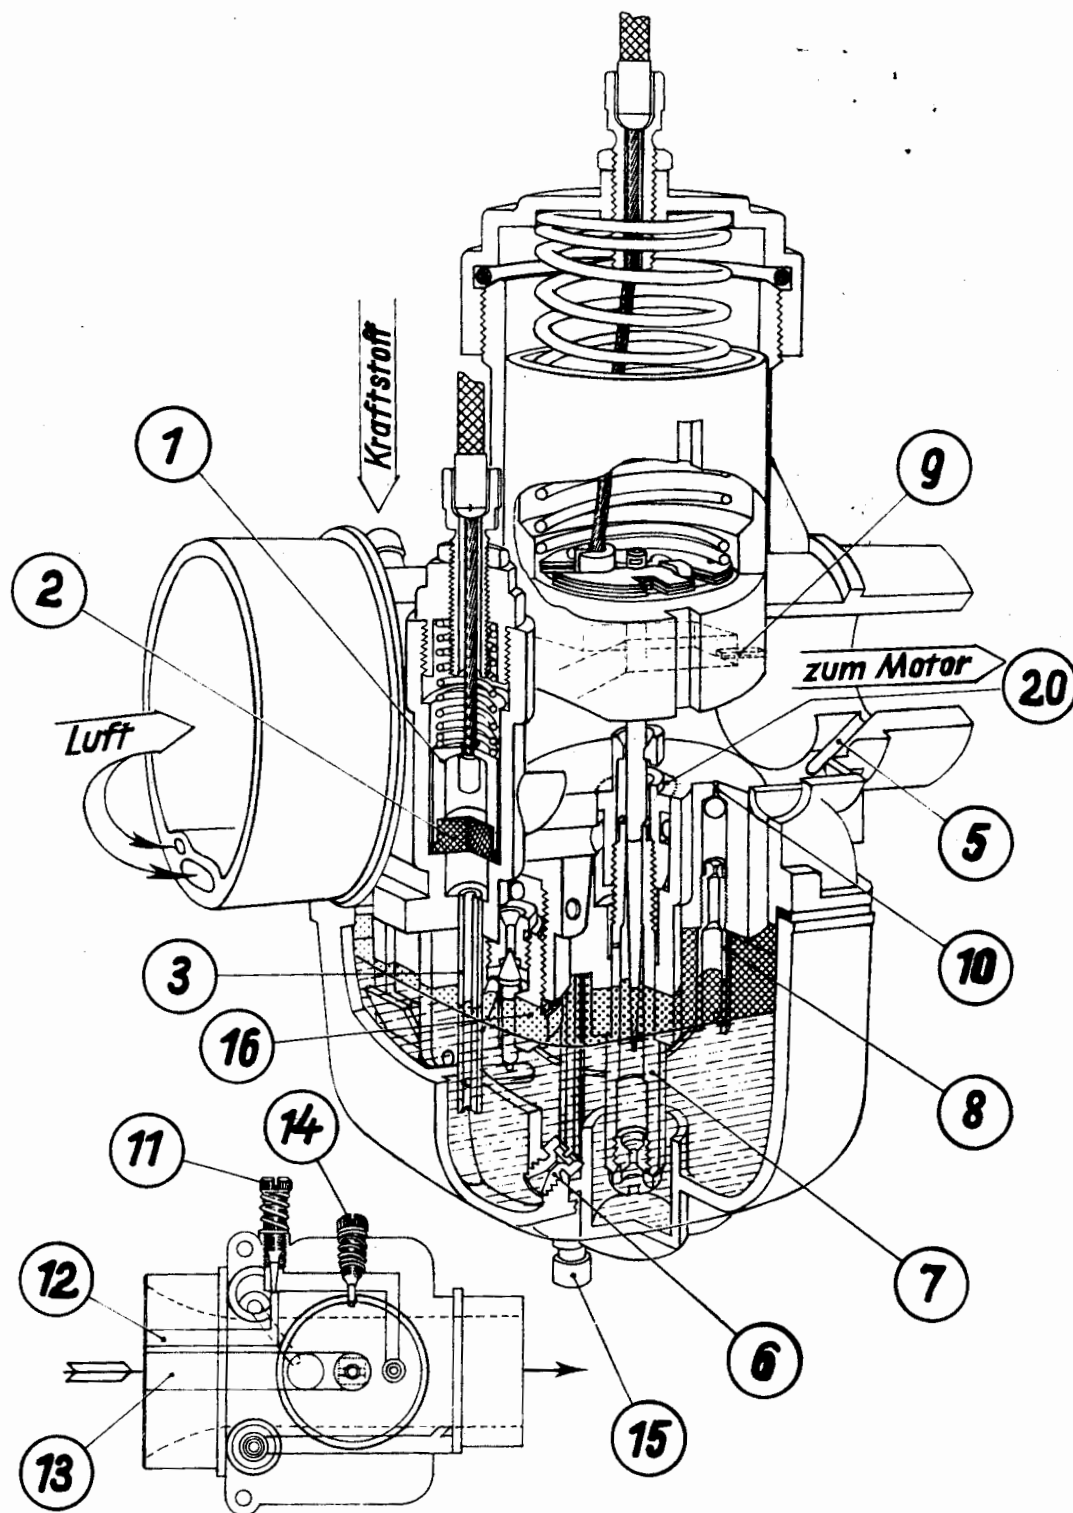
Sectional view of the BVF 30 N 2-3 carburetter (The schematic representation shows the ducts in horizontal section)
